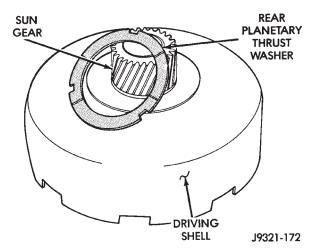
Rear Planetary Thrust Washer Removal—46RH
